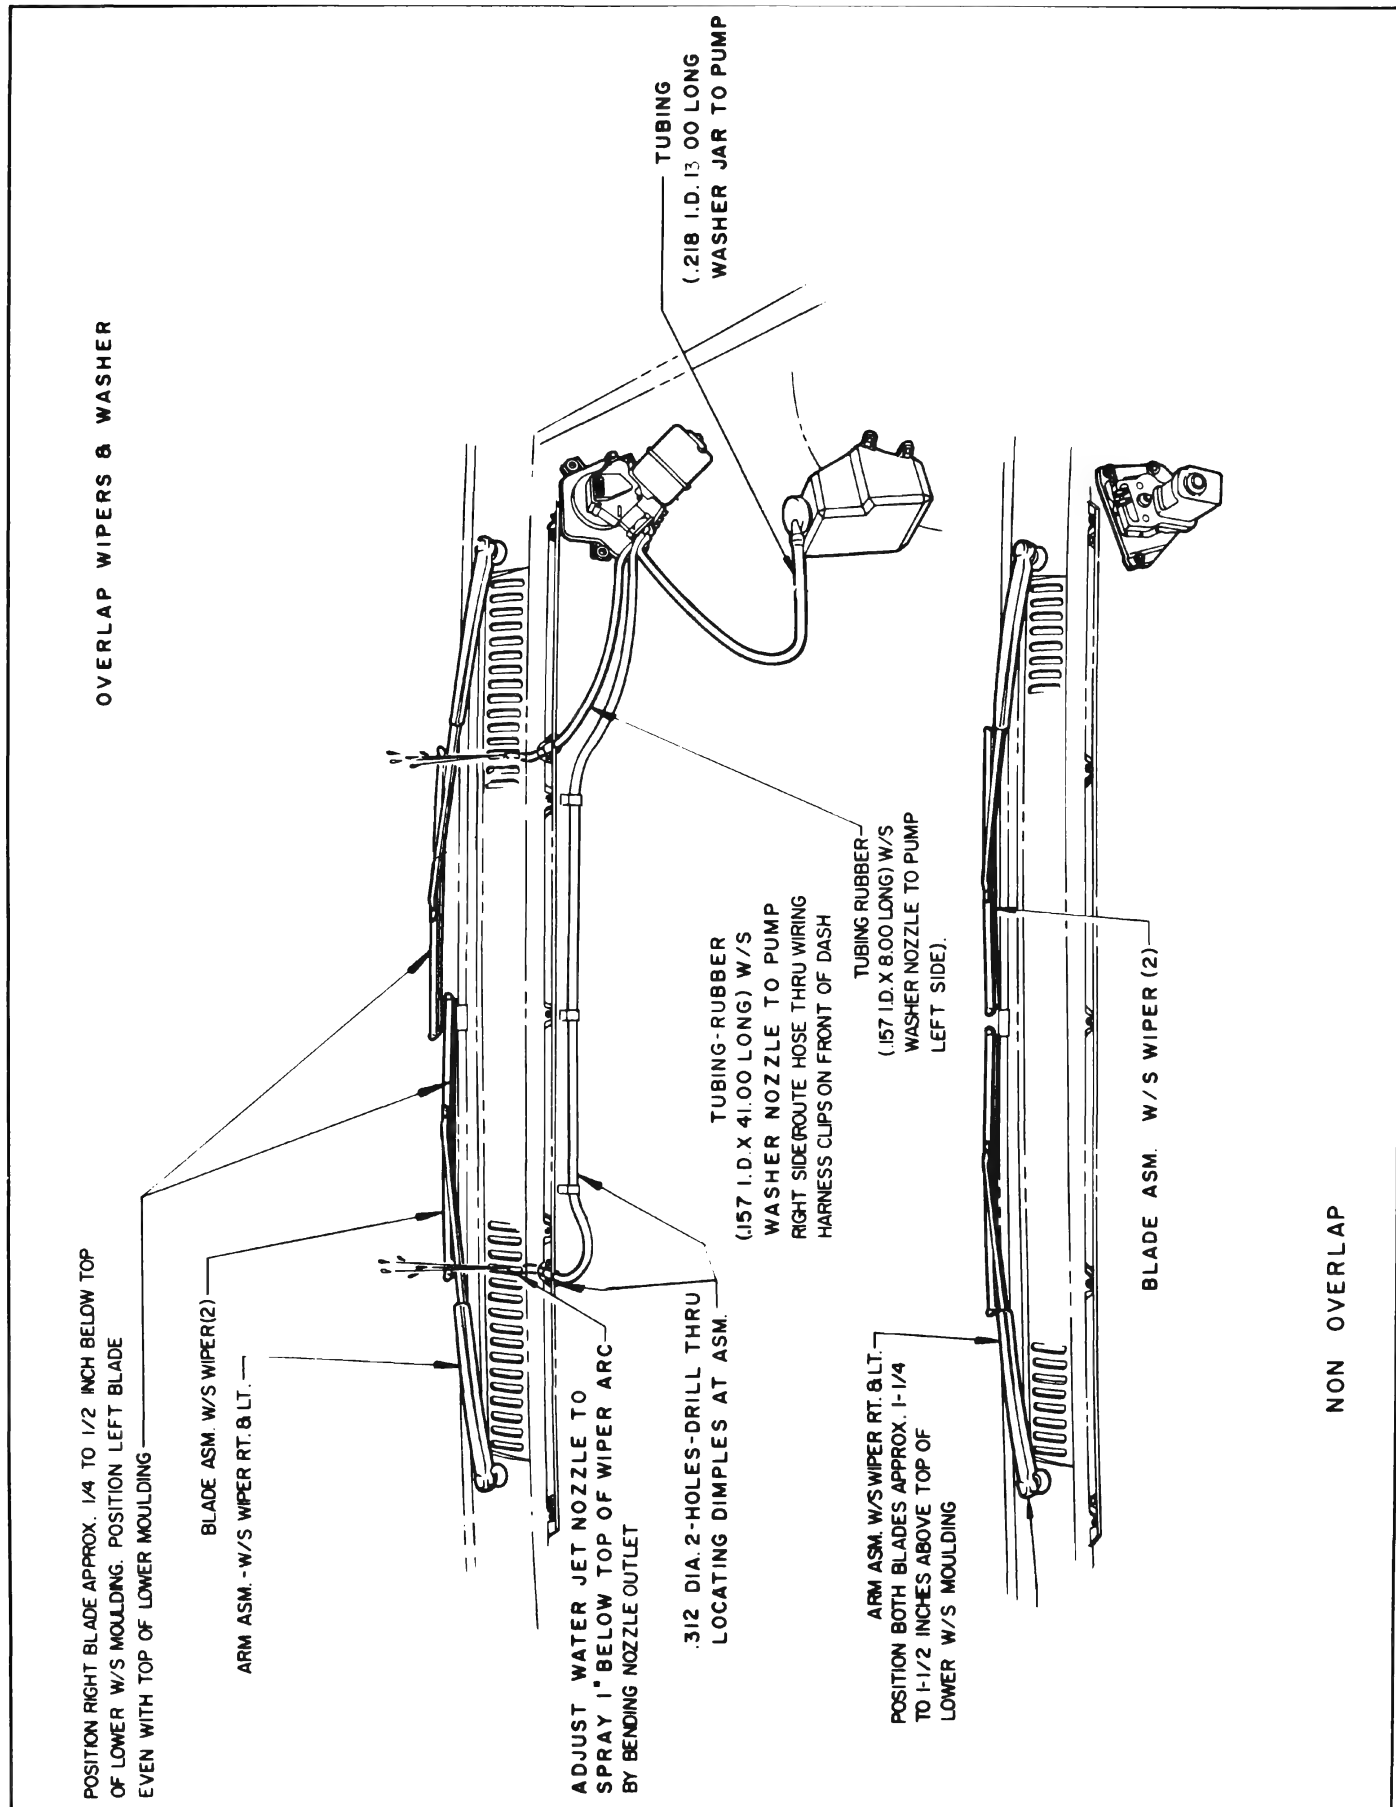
Washer Nozzle Aiming and Wiper Arm Installation
